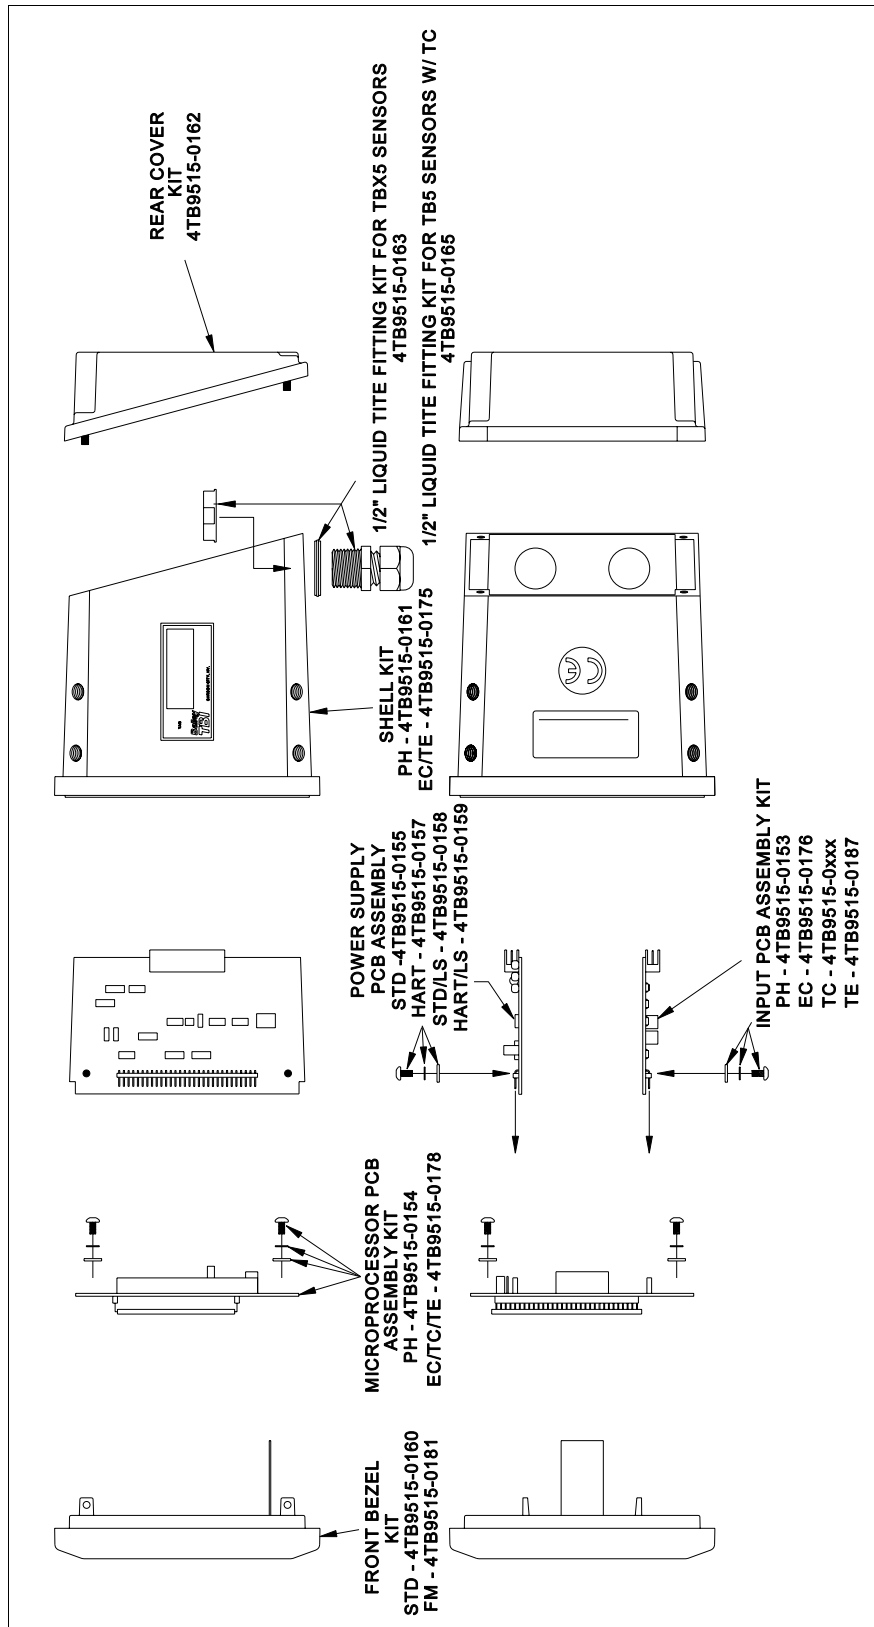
TB82 Advantage Series Exploded View Showing Kit Assignments.
